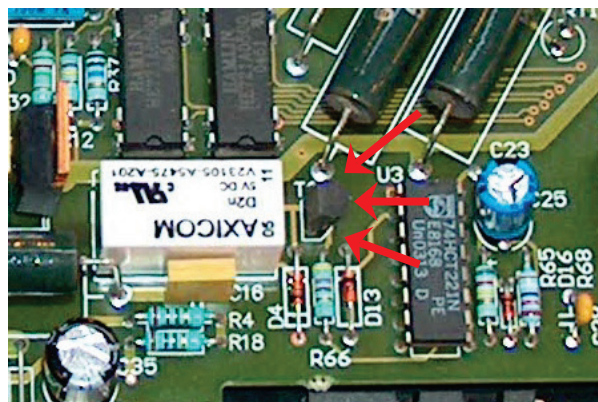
Cut out the transistor from the PCB if the type is a BC547B
